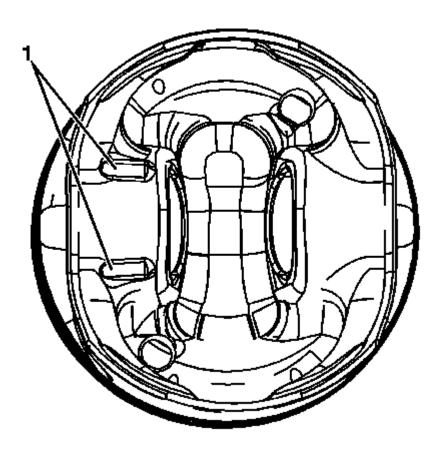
Cast Boss On Underside of Piston Courtesy of GENERAL MOTORS COMPANY
